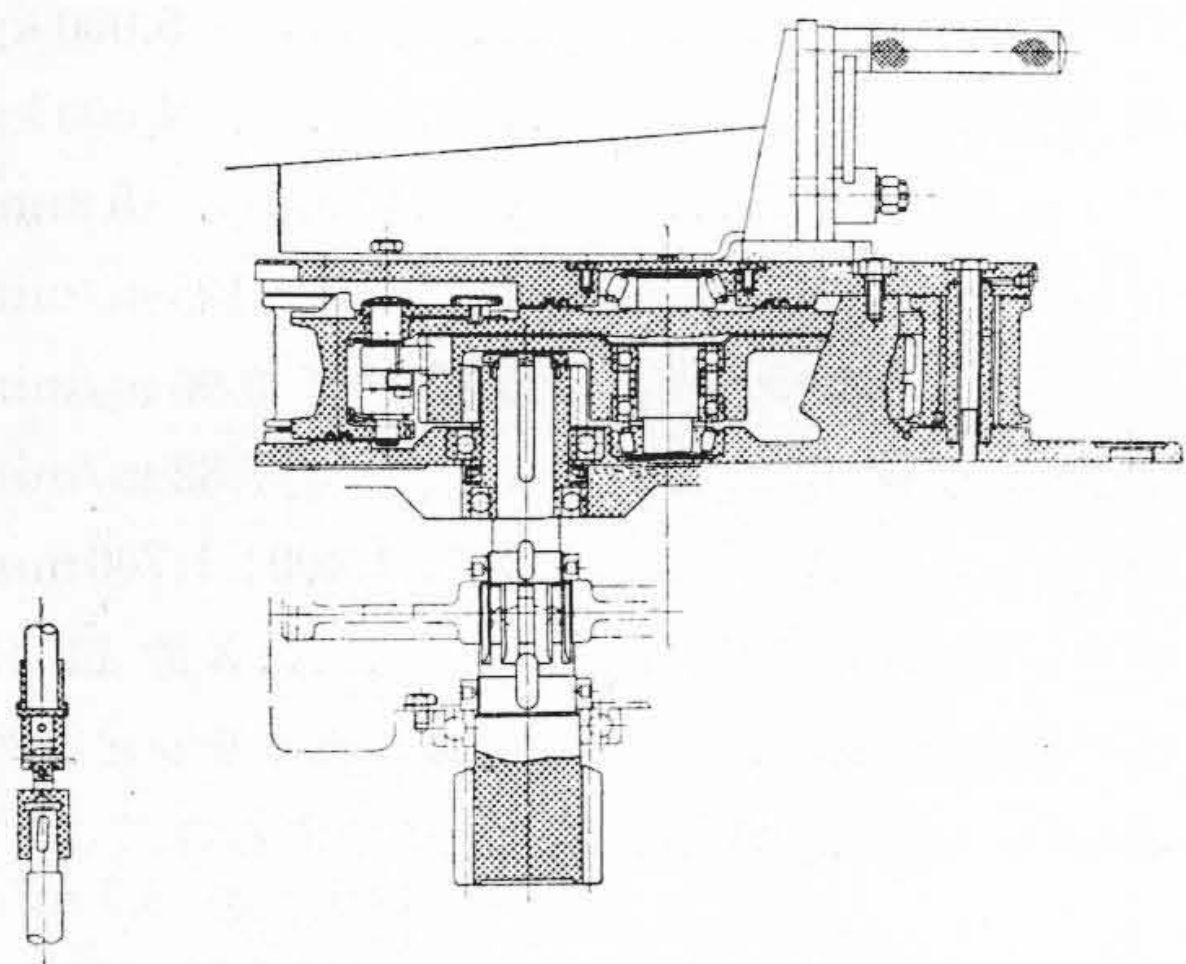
Dimensions of 40 kW Mechanical Sumping Coal Cutters
